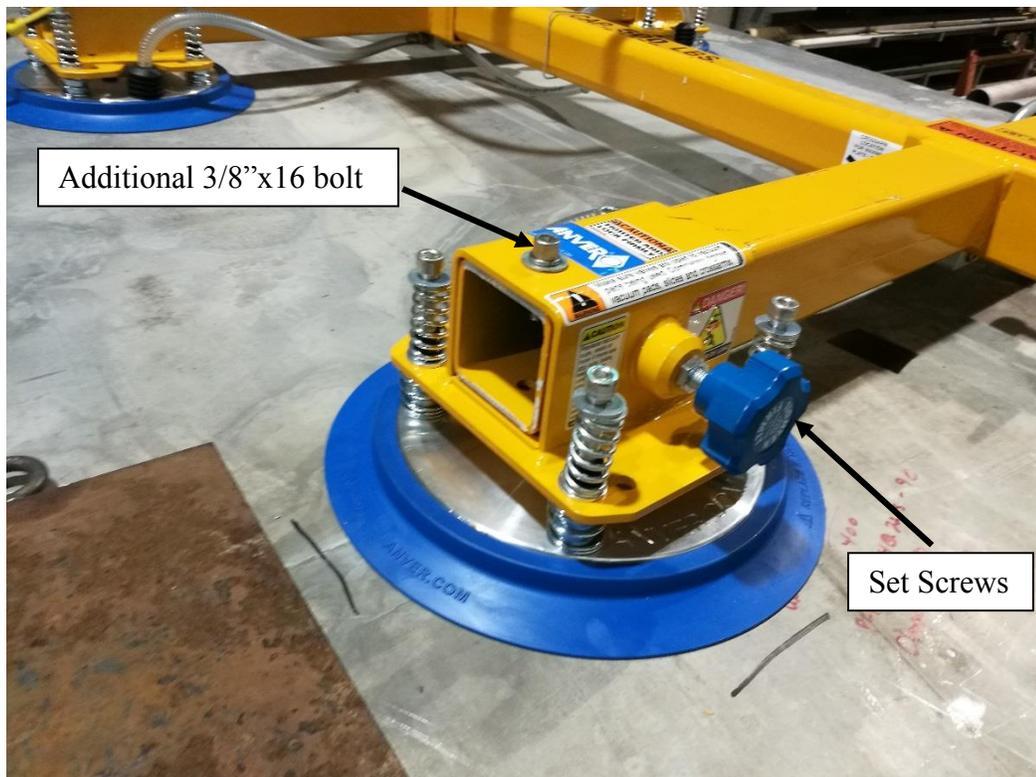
Vacuum pad assembly is locked with 3/8"x16 Bolt
